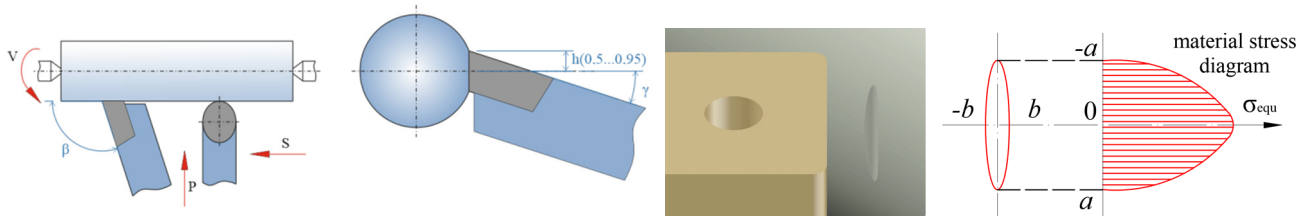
Scheme of smoothing processing using a carbide cutting plate as an indenter β —the angle of installation of the tool in the axial direction; γ —tool setting angle in the radial direction; h (0.5 ... 0.95)—displacement of the cutting edge of the tool relative to the center of the workpiece.
